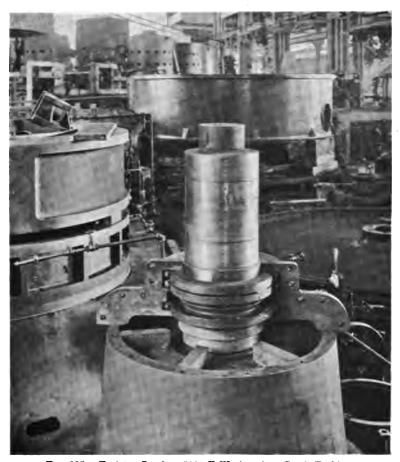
Footstep Bearing, 5000 K.W. American Curtis Turbine.
